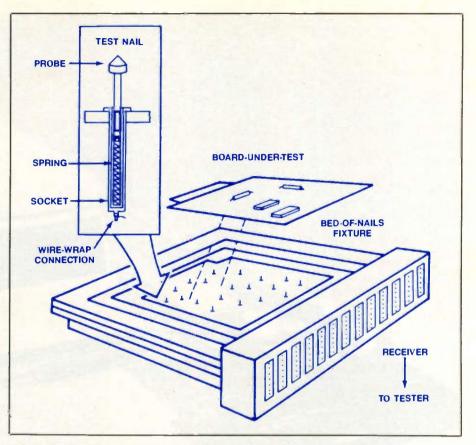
"Bed-of-nails" test fixture. (Courtesy Genrad).
